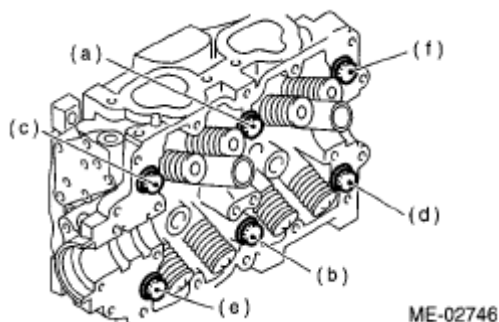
Identifying Cylinder Head Bolts Removal Sequence
